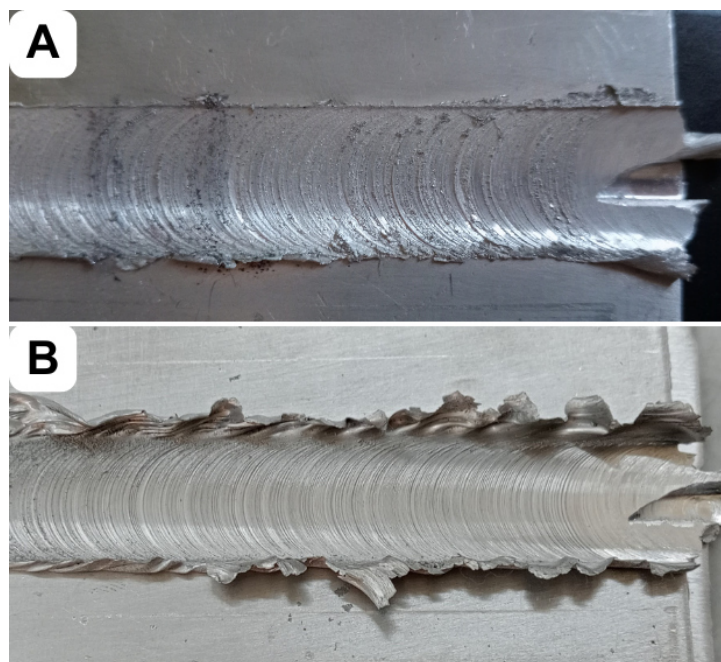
FSW tool print in joint: A) 30 mm/min, B) 6mm/min
